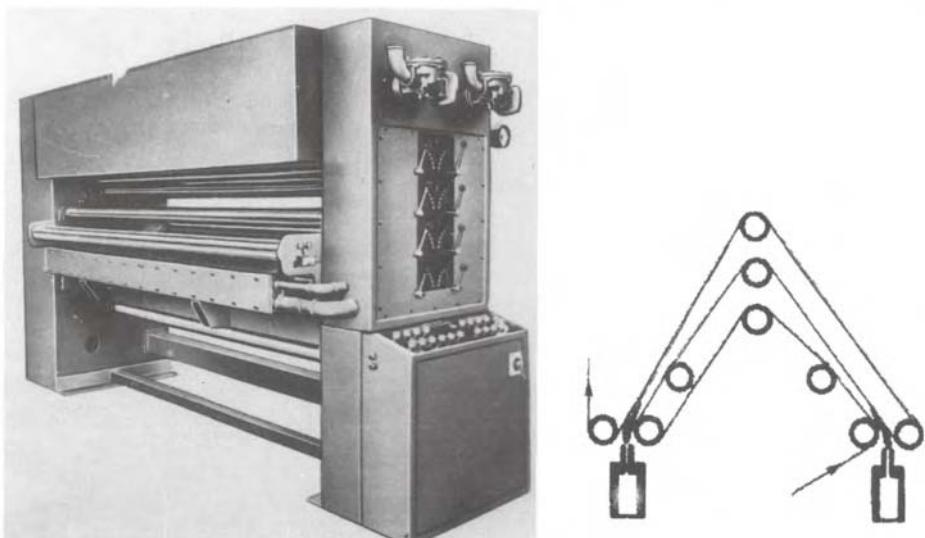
Two burner gas singeing machine (Courtesy of Ernest Turner (Parex) Ltd.).
